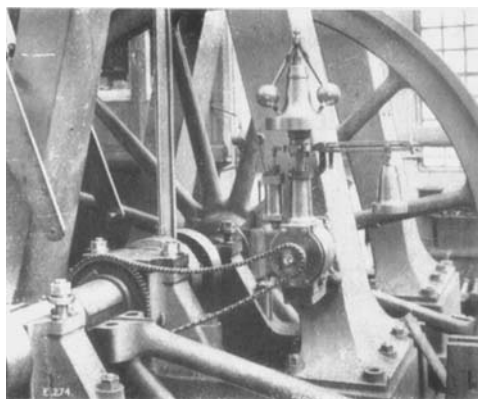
Governor connected to 214 I.H.P. Triple Expansion Engine by Noiseless Drive Chain. Speed of Engine, 23 R.P.M. ; Speed of Governor, 161 R.P.M.
